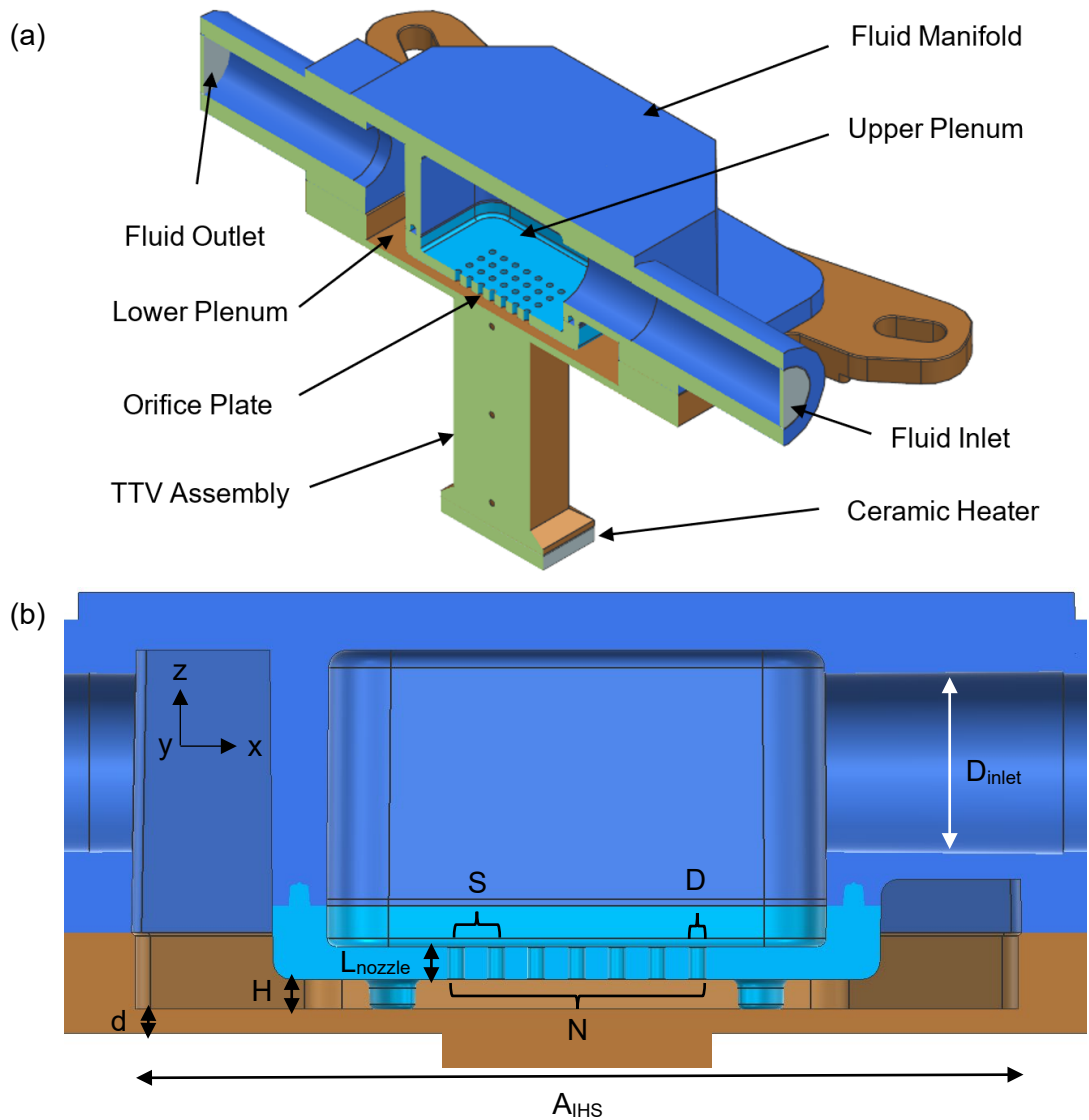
(a) Sectioned view of TTV and attached liquid coldplate heat exchanger assembly, (b) cross-sectional view of fluid manifold, highlighting key geometric parameters.
